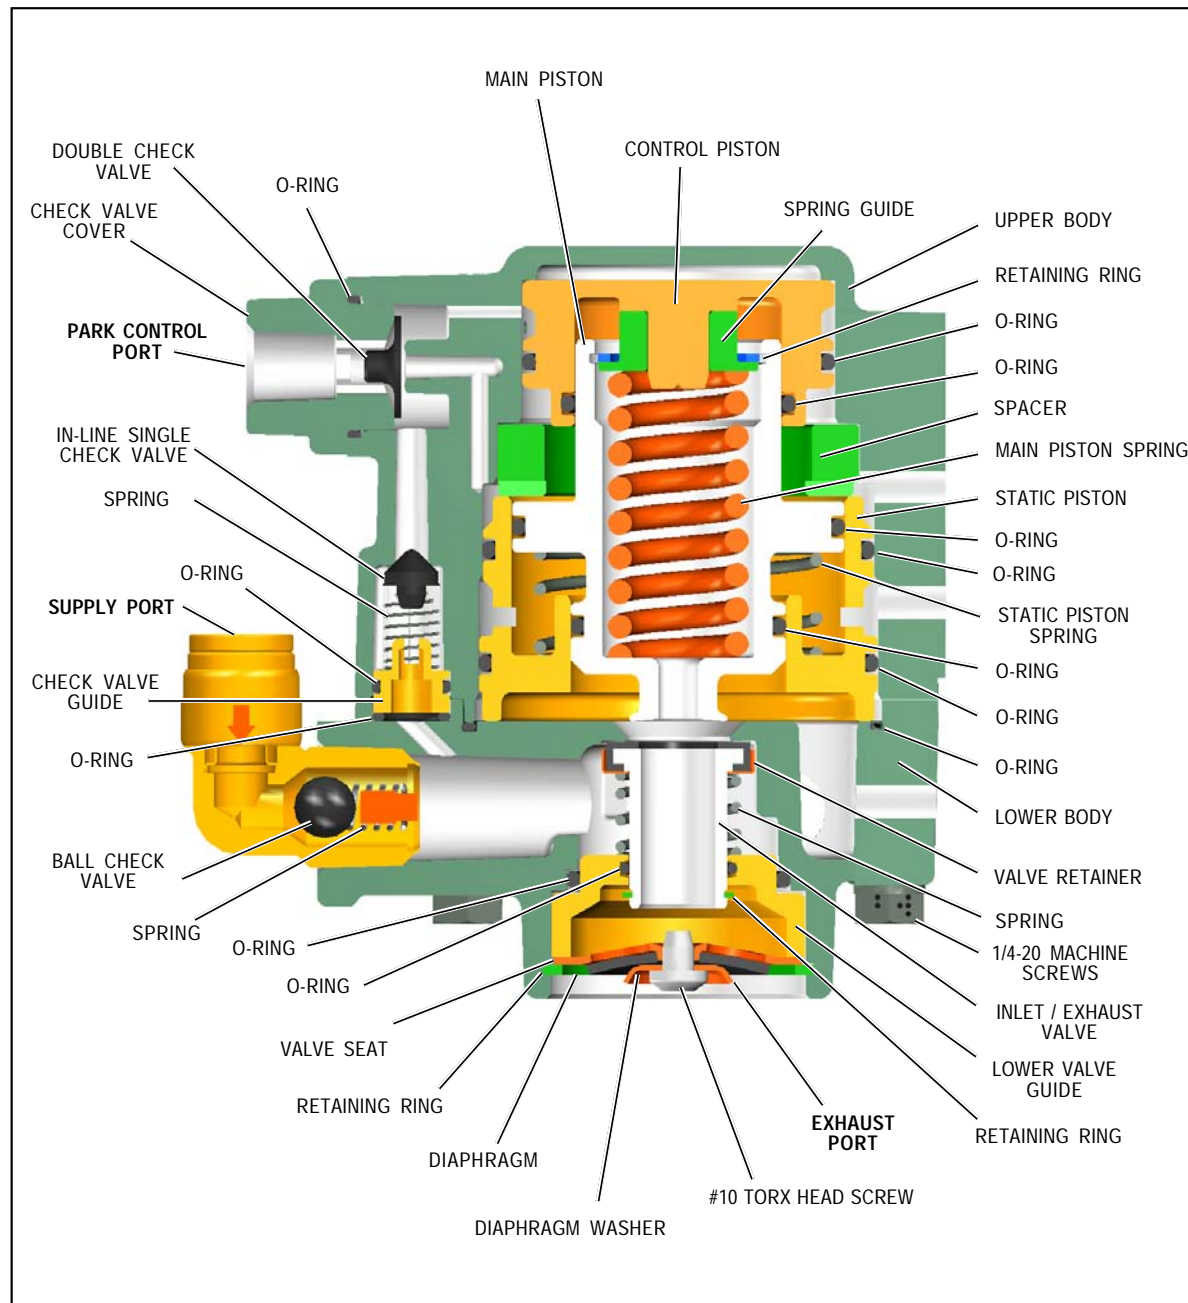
SECTIONAL VIEW OF SR-7™ SPRING BRAKE MODULATING VALVE USED IN RELAY VALVE APPLICATIONS
